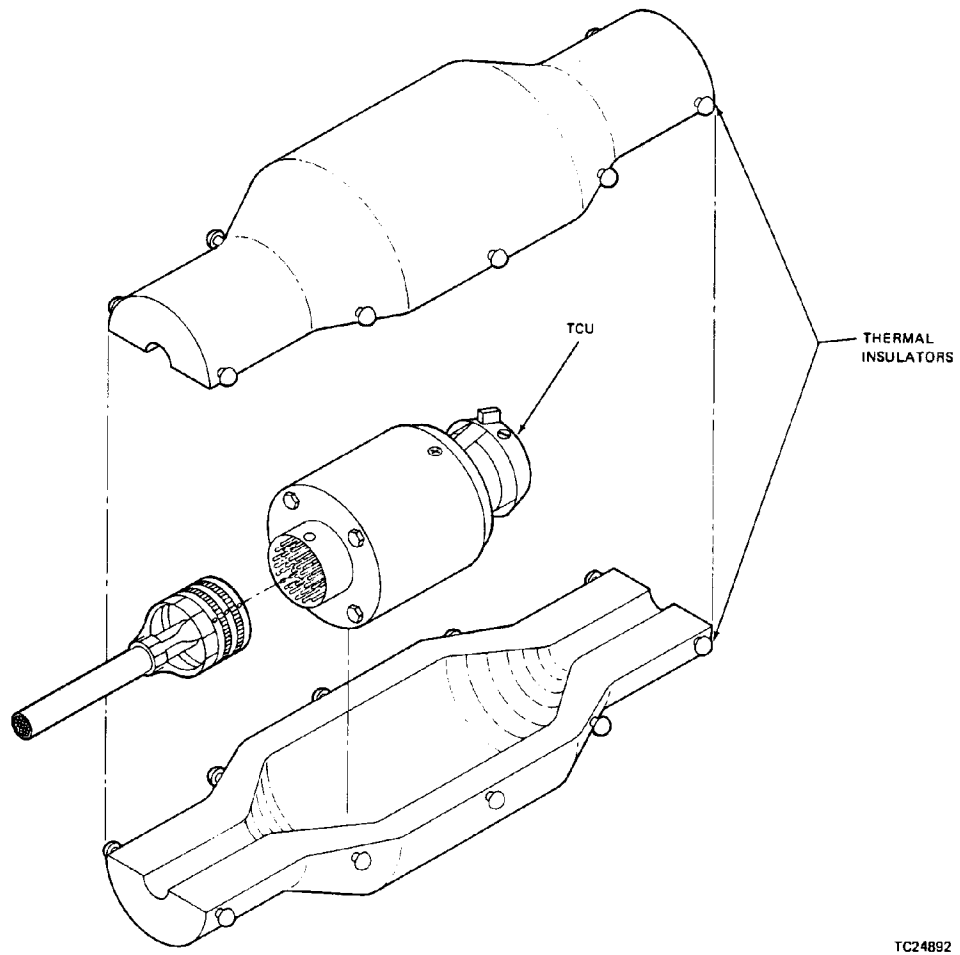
Thermocouple Compensator Assembly & Thermal Jacket
